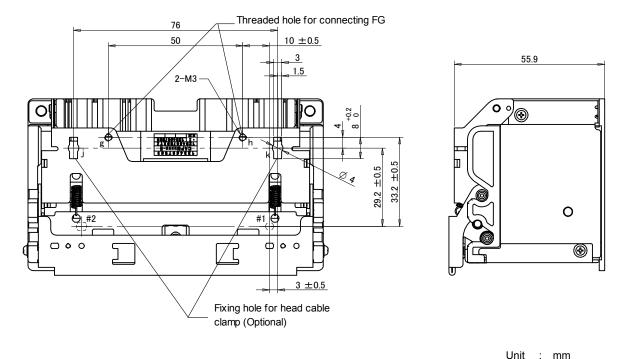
Dimensions for Positioning and Securing the Head block (Auto-loading Model)
